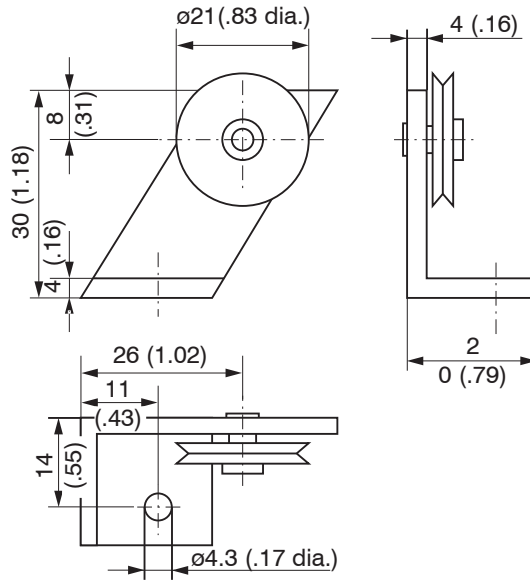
Guide pulley TR3-WDS with mounting socket, dimensions in mm (inches), not to scale
